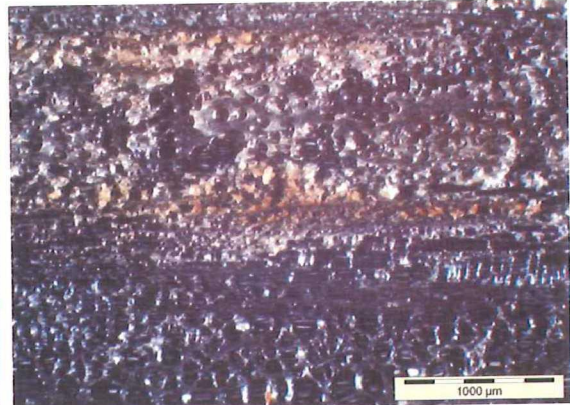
Clear signs of burned PEKK and countless voids at the welding interface of a sample clip welded at 2,000 [J].
